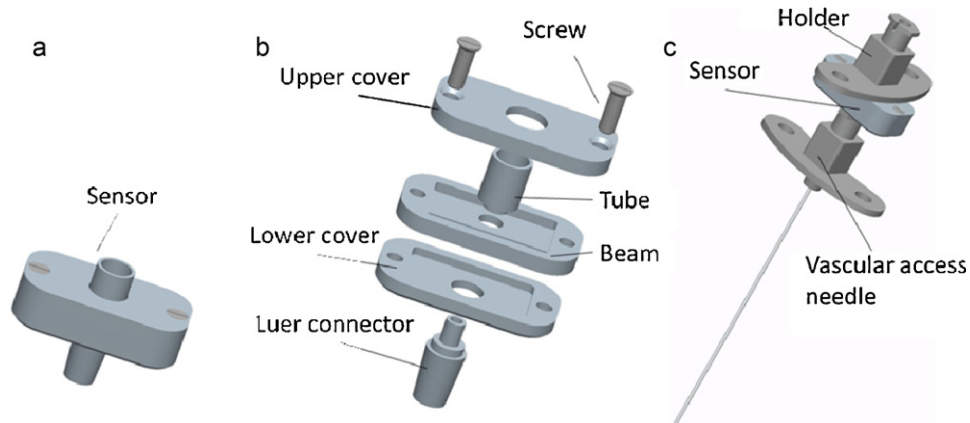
Needle force sensor structure (a) sensor assembly; (b) exploded view of the sensor and (c) sensor inserted in an arterial puncture needle.
